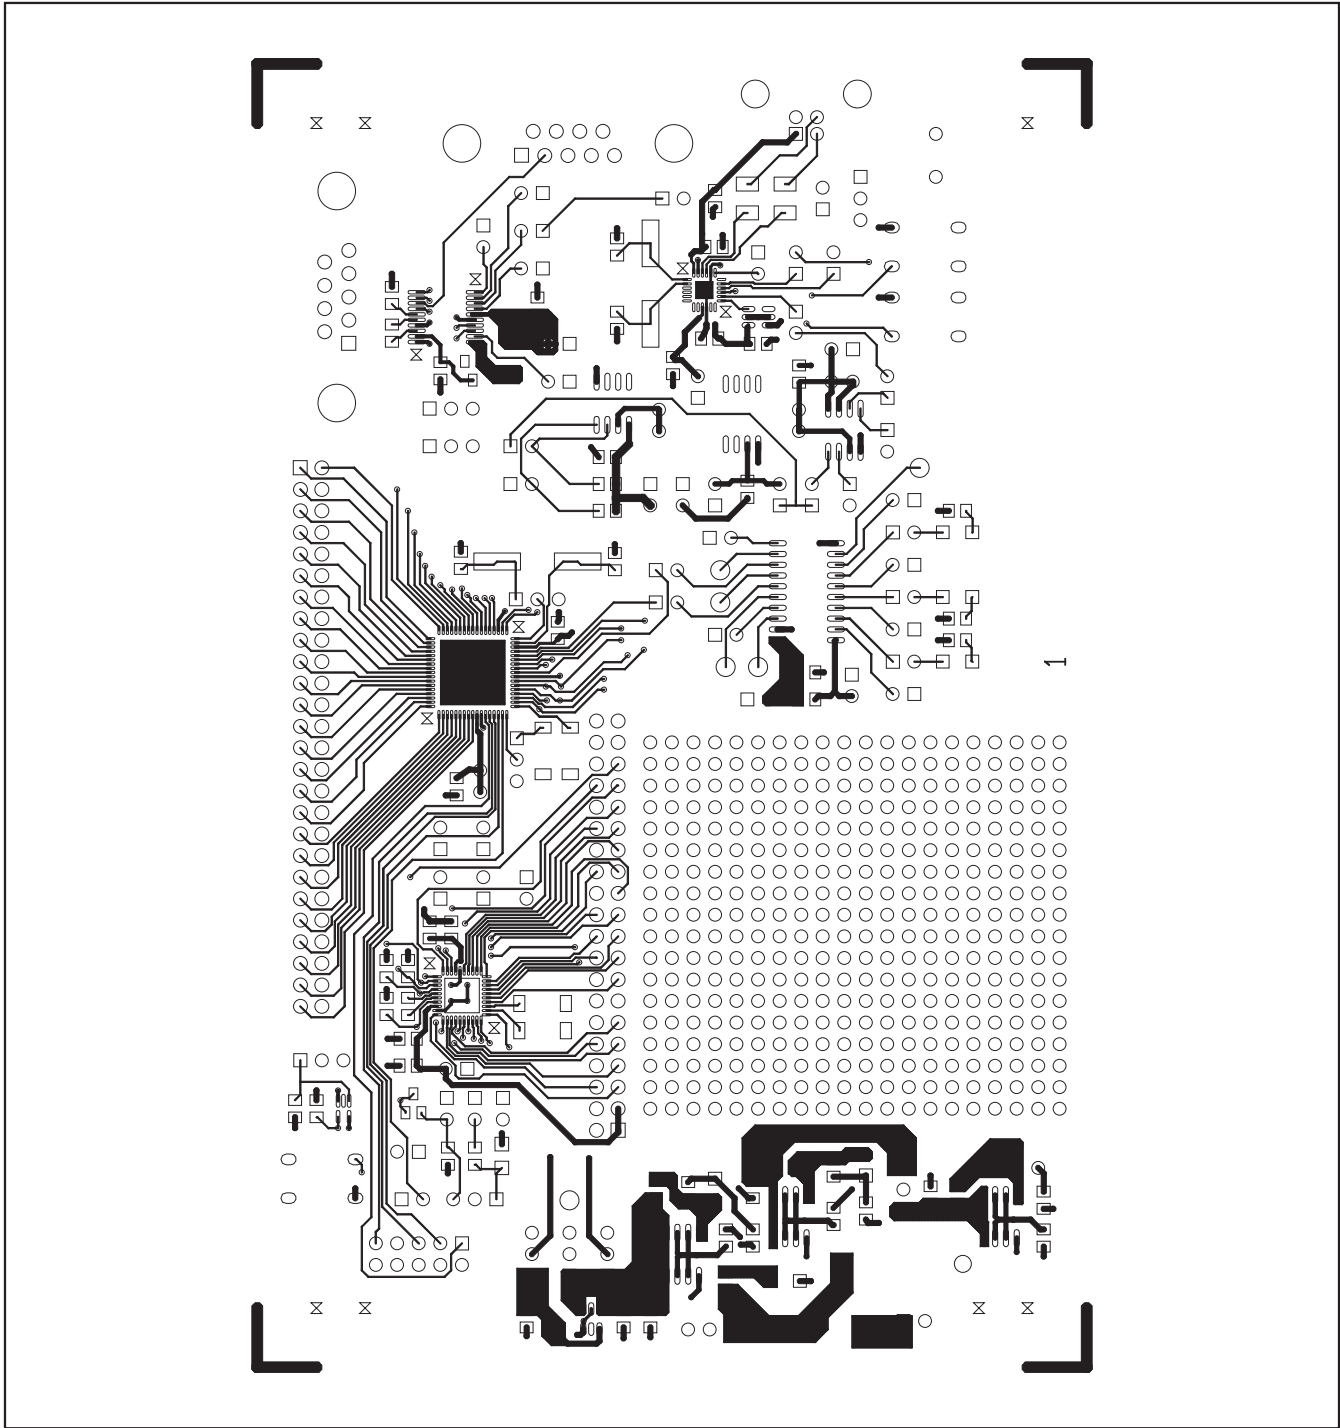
MAX1358 Evaluation Kit PCB Layout—Component Side
